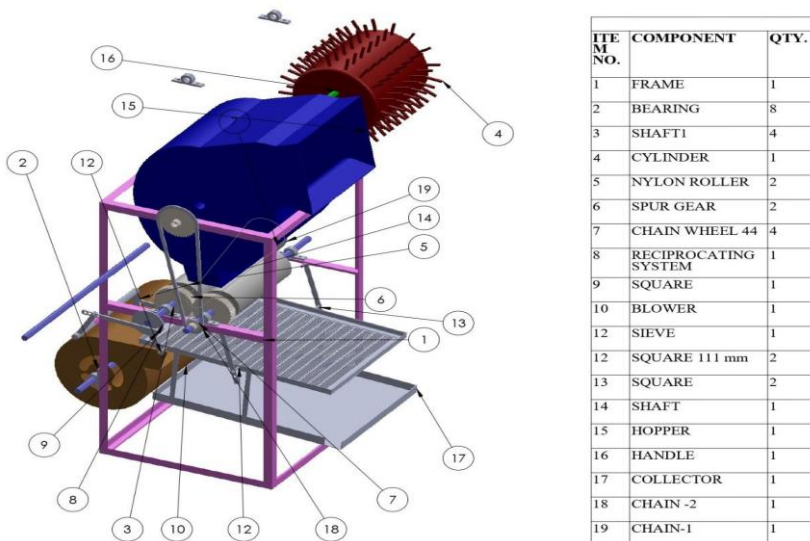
SOLIDWORKS drawing of development of modified linseed crop thresher
